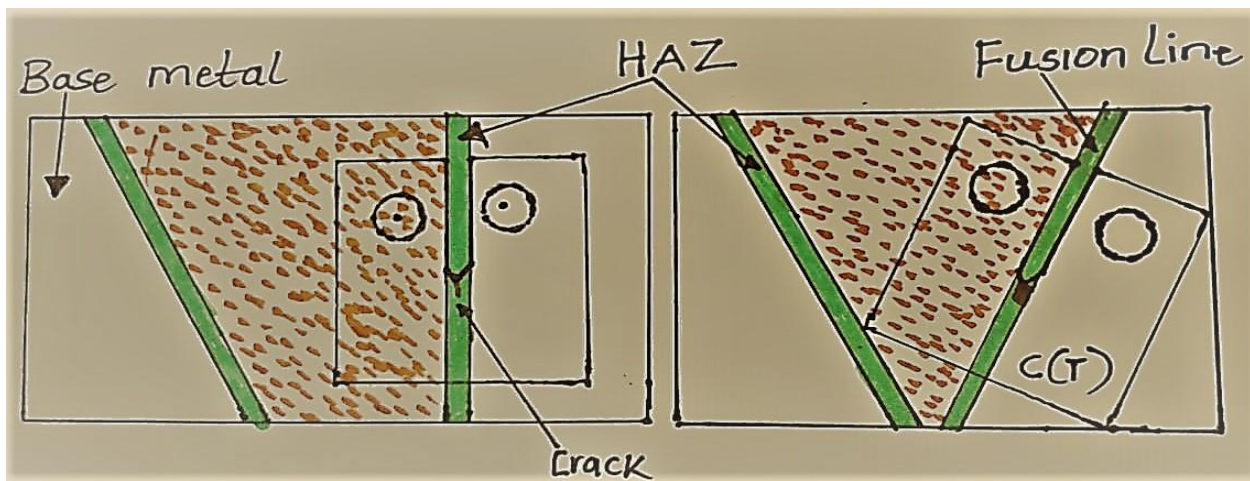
Design options for notches in fusion weld joints in compact tension specimen [6].
